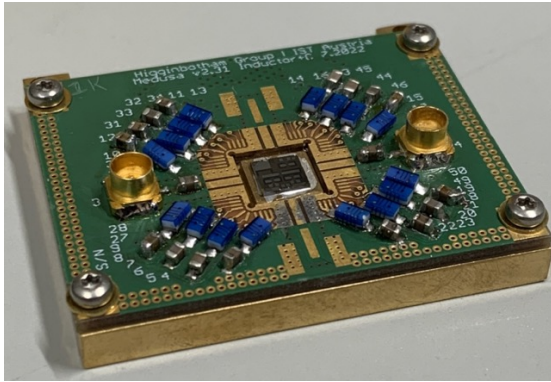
Sample h3 in the PCB and sample holder before wirebonding.
